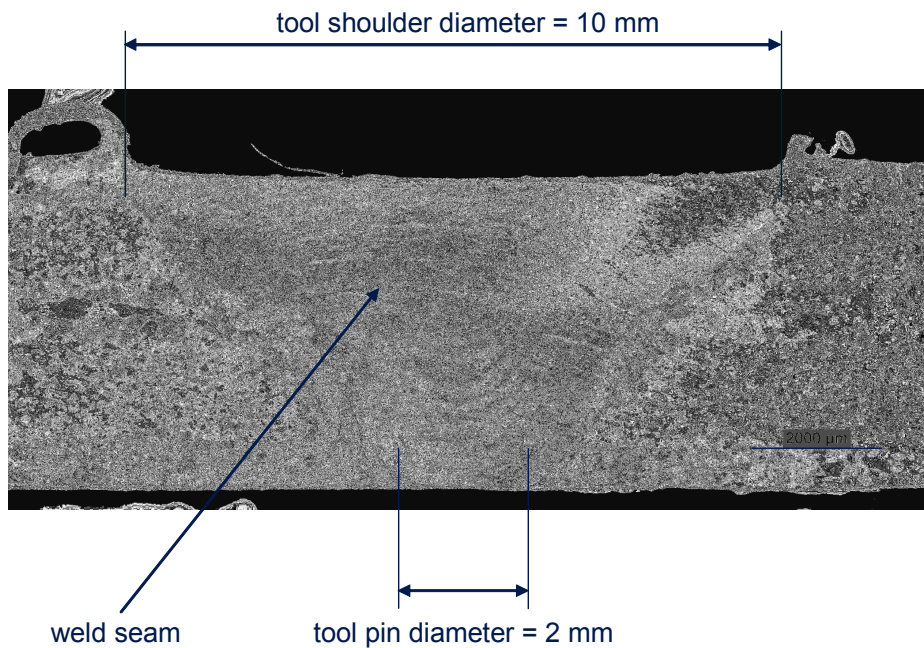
Cross section of a weld seam from a friction stir welding experiment
